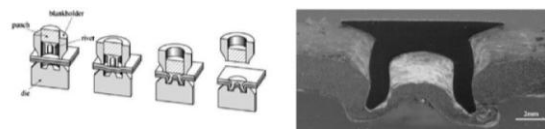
Self-piercing riveting process and cross-section of SPR joint [6]
